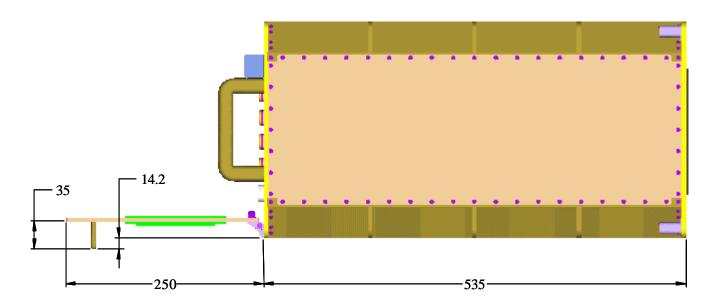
Side View of ACOP with the Front Panel Open (dimensions)
